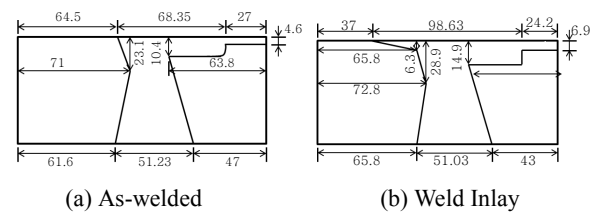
Dimension of weld specimens (XY plane)
